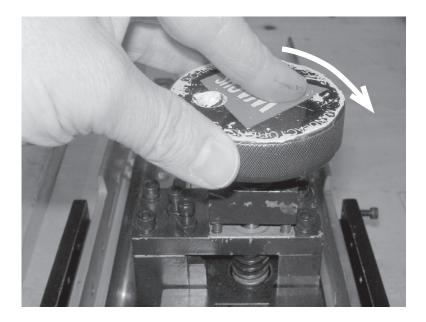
Insert the feed screw back through the end block and screw it into the slide by turning the knob clockwise.
